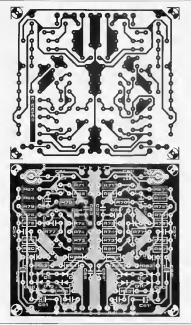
Layout and component side of the DNL board: as the DNL should be suitable for stered, the board consists of two symmetrical halves.
